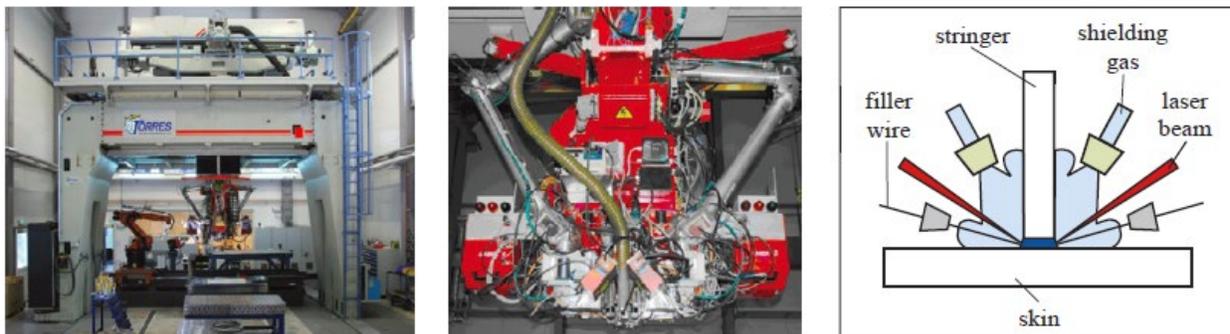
(a) Laser welding facility; (b) laser processing head; (c) schematic diagram of the joint configuration. Source: (Enz et al., 2012)
